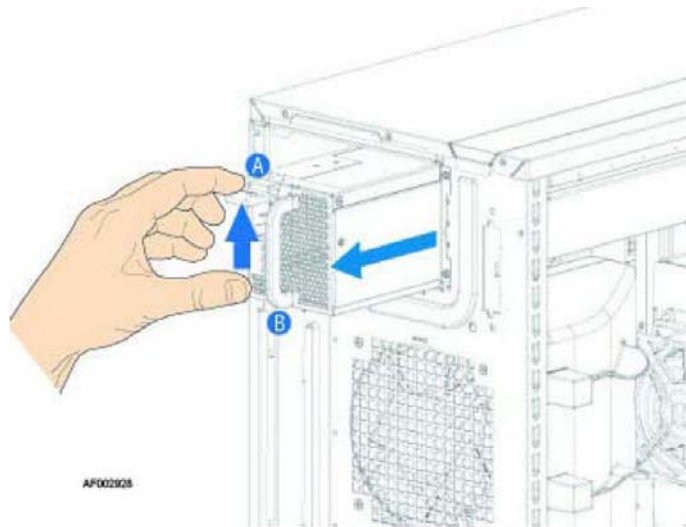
Removing Hot Swap Power Supply Module from Chassis
